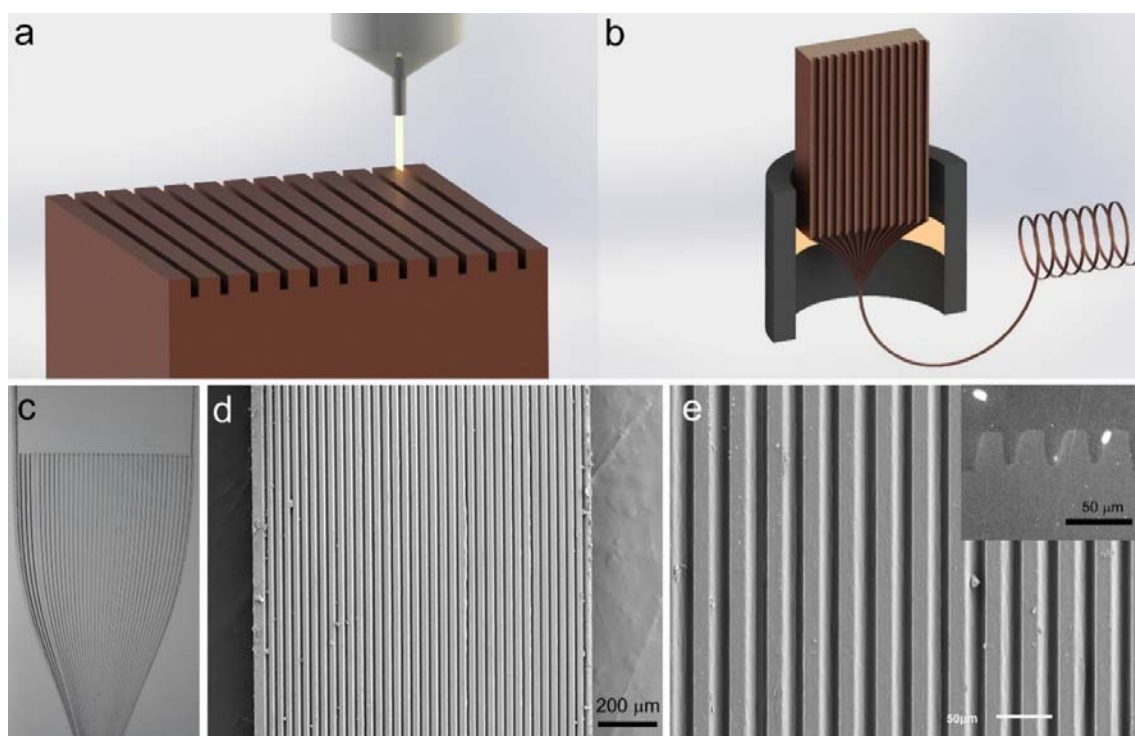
The laser cutting method with fiber drawing is shown. (a,b) The processing of a plastic PMMA preform with the CO₂ laser cutting method and drawing of the patterned preform is depicted. The drawing process enables the fabrication of a wide range of patterned sizes by controlling the draw down ratio. (c) The preform neck after drawing of the PMMA is shown. (d,e) SEM images of patterned PMMA fiber are depicted. The inset shows the cross-section of this fiber.
